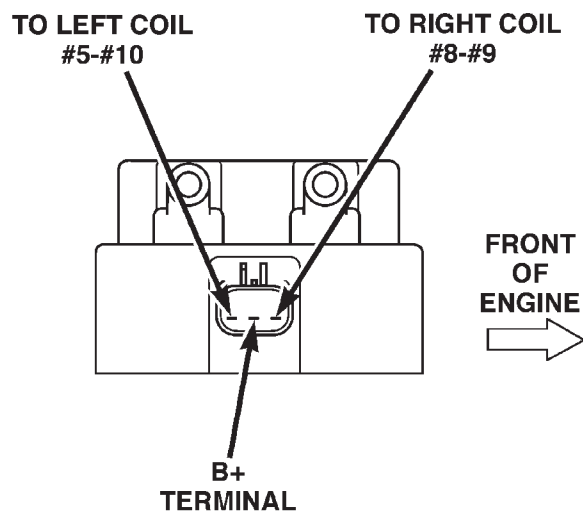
Checking Coil Primary Resistance—Rear Coils—8.0L V-10 Engine
